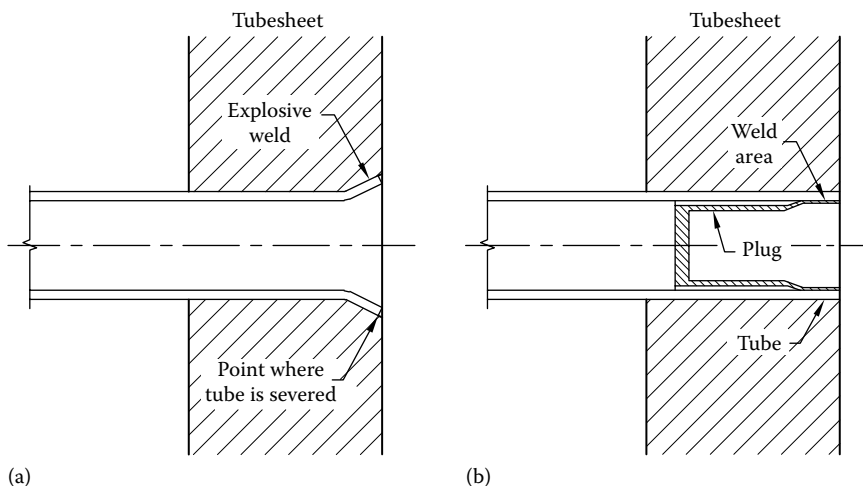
Angular geometry explosion cladding: (a) tube-to-tubesheet expansion and (b) plugging of leaking tube—Dynaflux[®] explosively welded plug.
